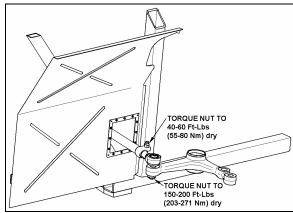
DRAG LINK TO BELL CRANK CONNECTION
